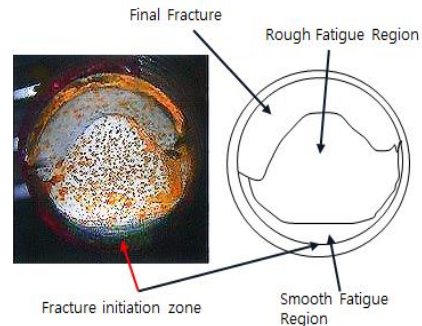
Macrograph and schematic of fracture surface of one of the fixing bolts
